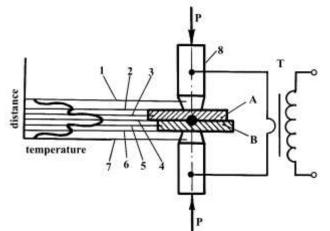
Scheme of spot welding: 1...7 – resistance and temperature zones; 8 – electrode; A, B – parts to be welded; T – electrical transformer; P – compressing forces
